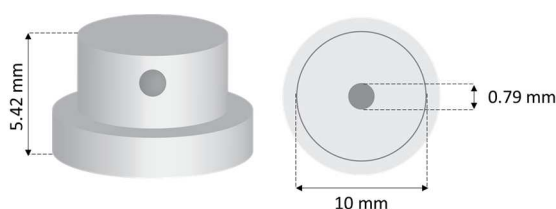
Steel sphere with diameter of 0.79 mm embedded in polyurethane cylinder. This design allows mounting the sample directly inside the filter holder of a Nikon MCT225 system.
